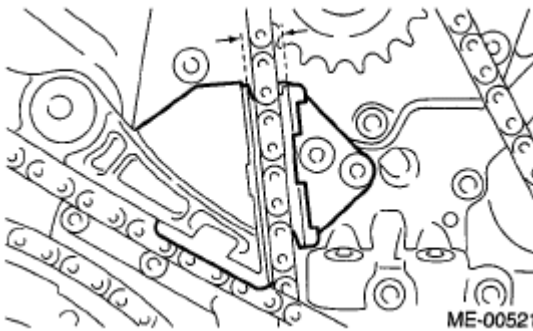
Locating Chain Tensioner Bolts (RH)
